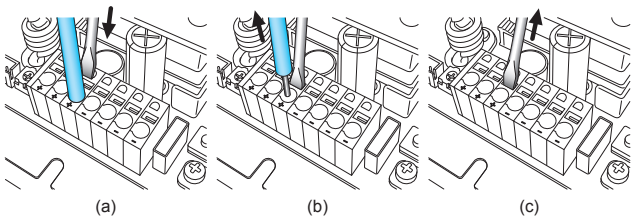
Releasing method of Ferrule terminal, Solid wire and Stranded wire
